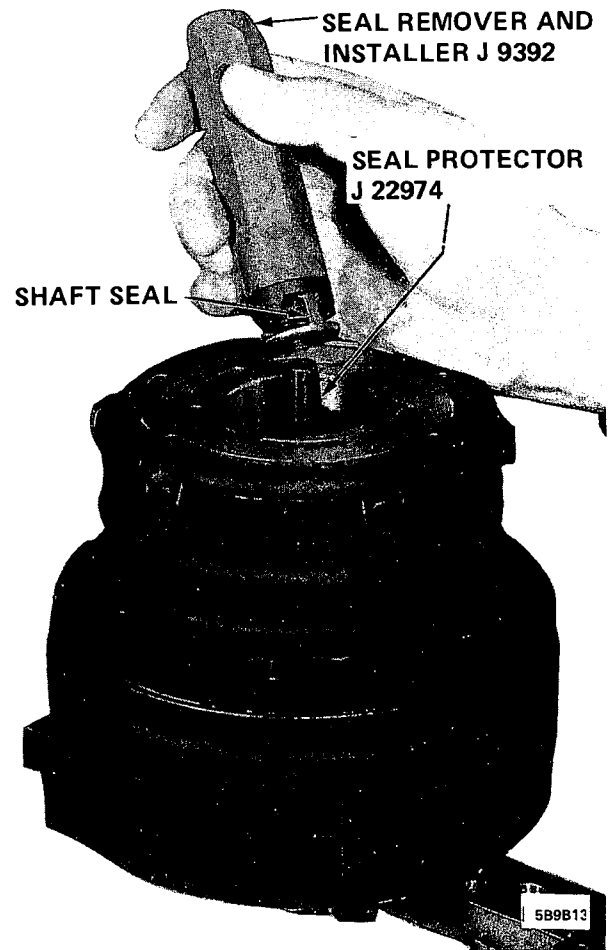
B-36 - Using Remover and Installer J9392 - 4 Cylinder Compressor
